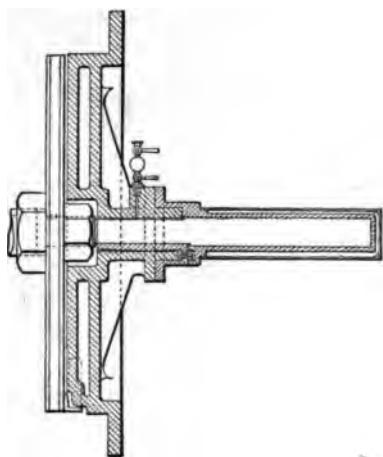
Rail-mill Engines: Second Piston fastening on Rod.
